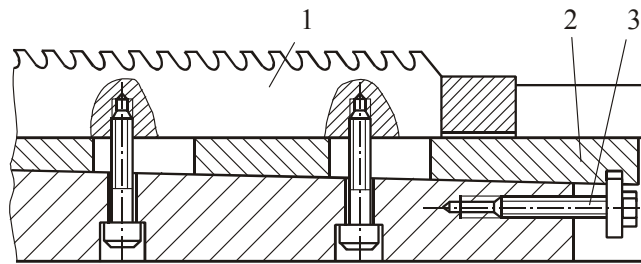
Height adjustment of sections of a surface broach performed with a wedge: 1 – broach section; 2 – wedge; 3 – adjustment screw
